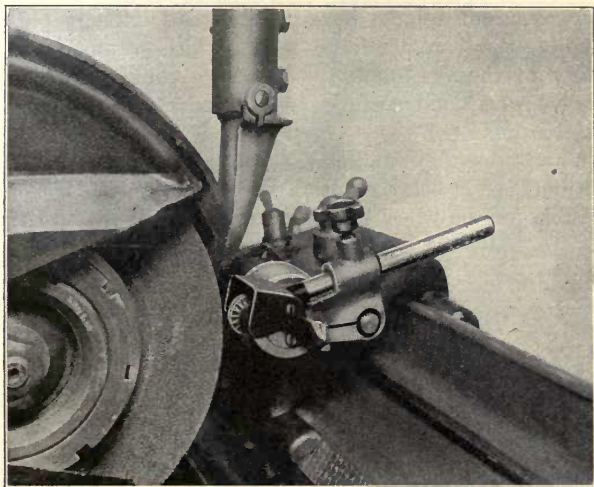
Dressing the wheel on a Norton grinding machine with a Huntington star-wheel dresser.
